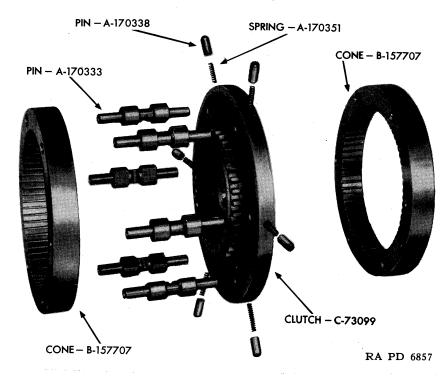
Parts of fourth and fifth gear synchronizer assembly.
